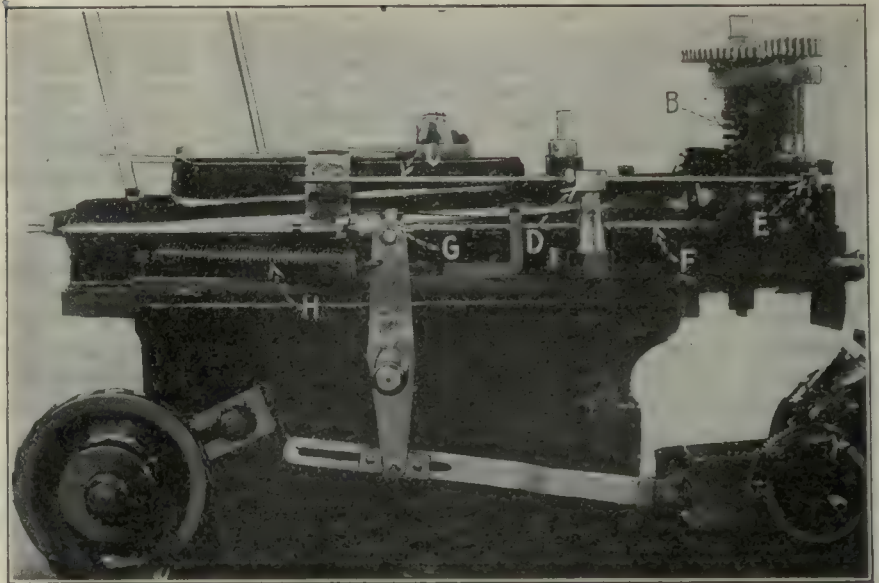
A SIDE VIEW OF THE SHAPING MACHINE
